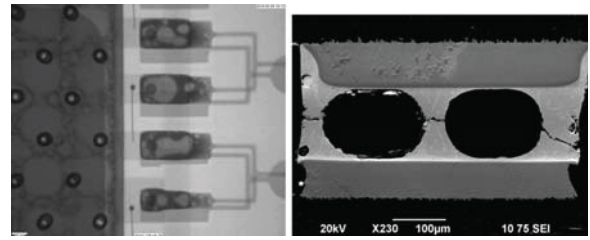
X-ray image and an SEM image showing voids in the solder joints of a TOPS component on a thick Au board.
